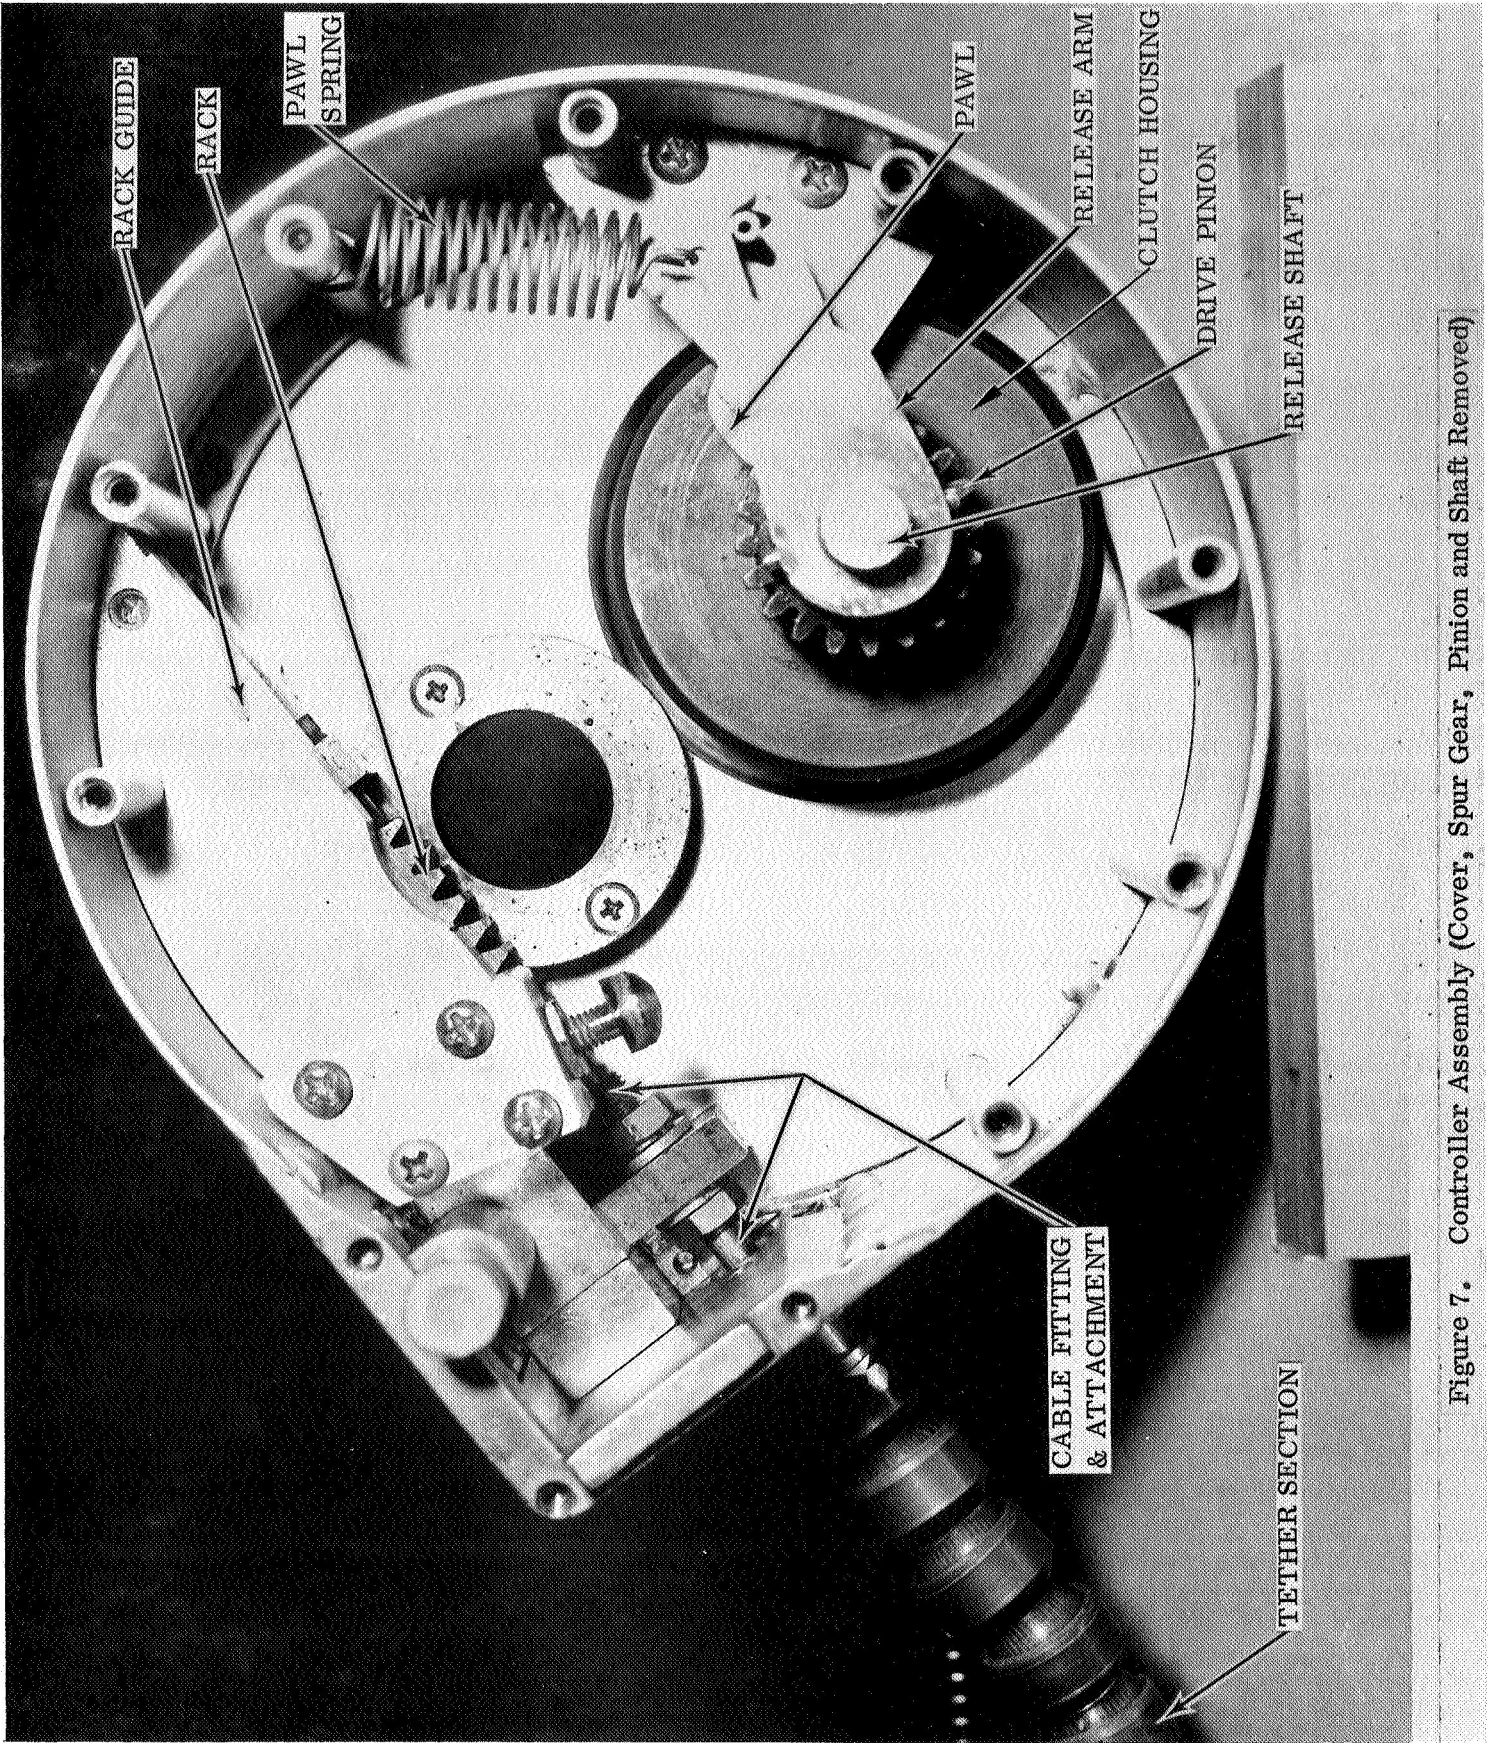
Controller Assembly (Cover, Spur Gear, Pinion and Shaft Removed)
